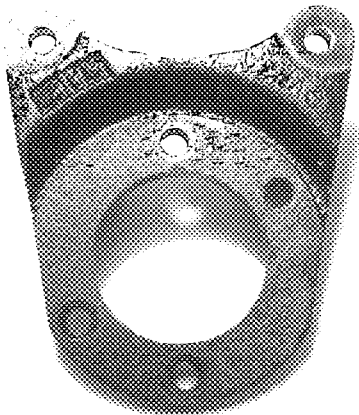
FRONT AND/OR REAR BRAKE CALIPER TYPE 1, 2, 3
